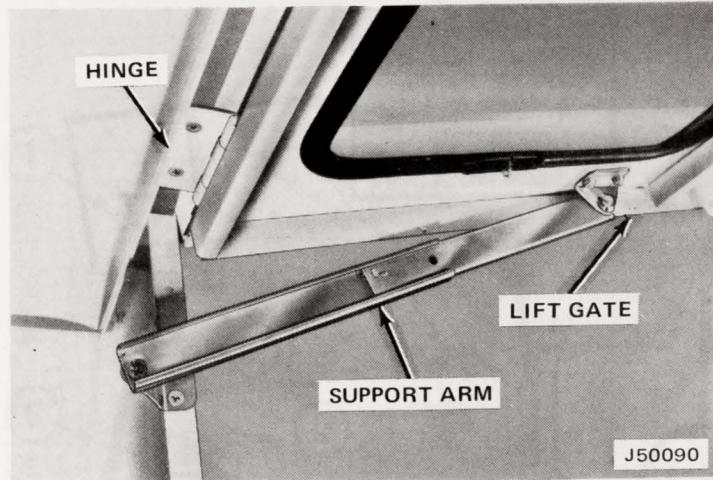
Liftgate Hinges and Support Arms Installed
